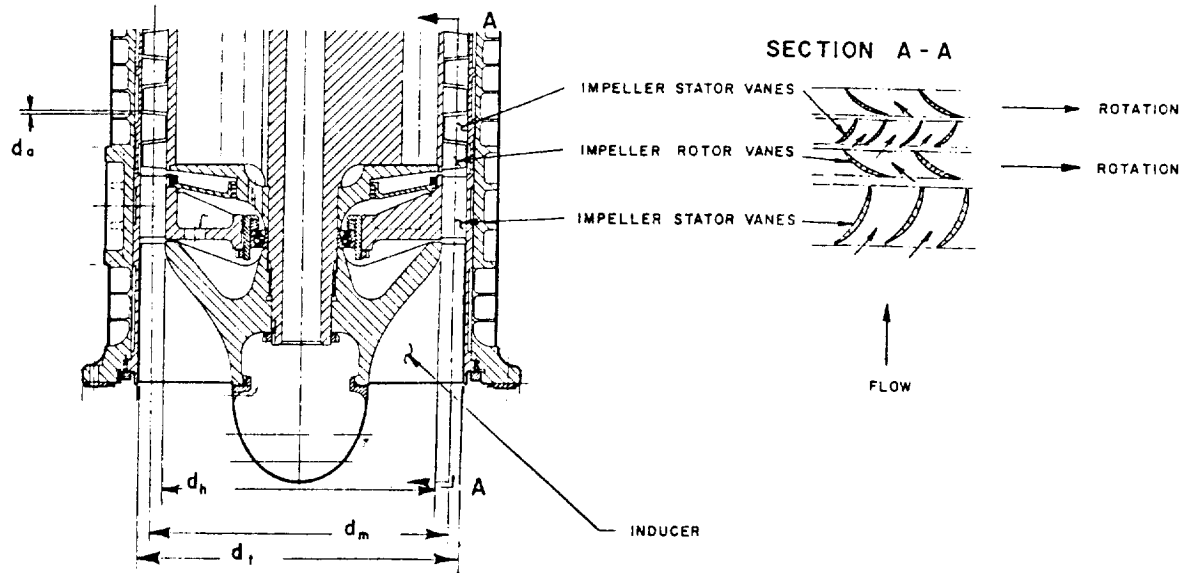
Inducer, inducer stator, impeller rotor, and impeller stator of an axial-flow pump.
